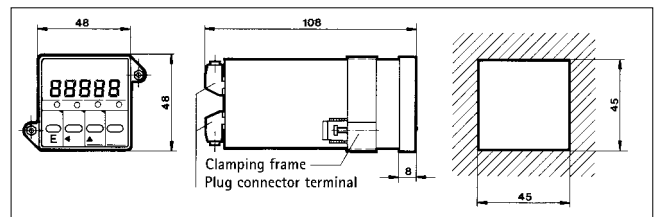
Installation dimensions of counter signo 0 721 XXX
